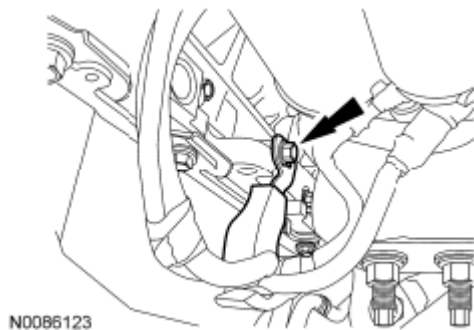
Locating Starter Wiring Harness Rear Support Bracket Bolt
